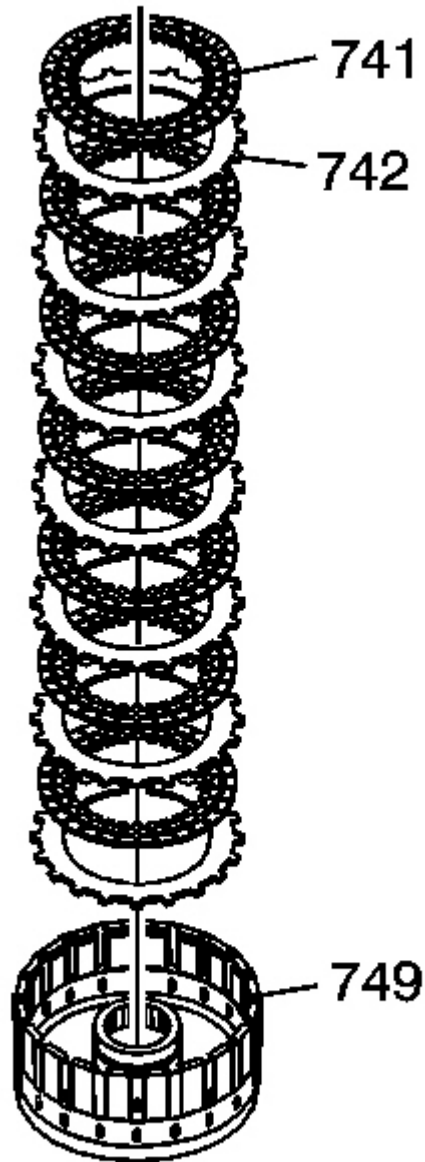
Steel Plates, Fiber Plates & 2nd Clutch Hub Removed
